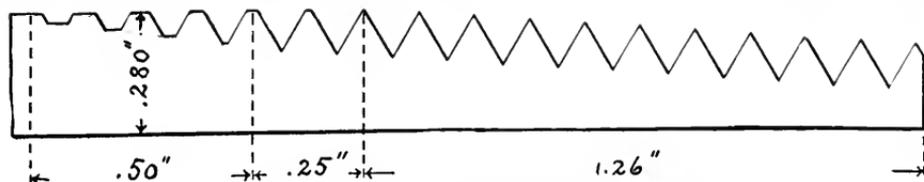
SECTION THROUGH A SIX-INCH PIPE.
